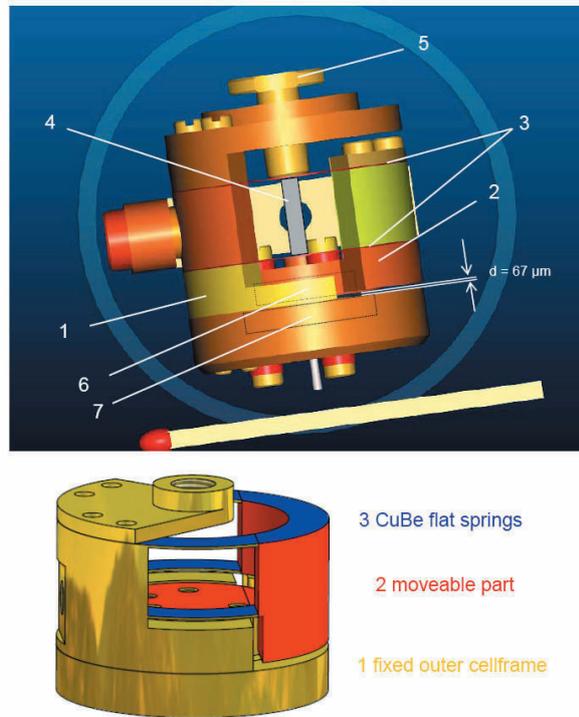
Drawing of the cell. 1: cell frame, 2: moveable part, 3: CuBe flat springs, 4: sample, 5: adjustment screw, 6: upper capacitor plate, 7: lower capacitor plate.
